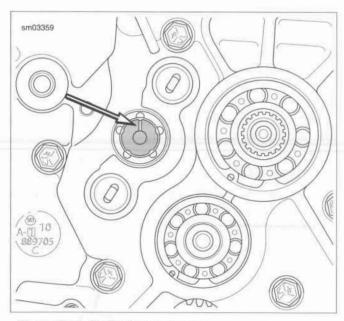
Scribed Line on Shifter Drum at 12 o'clock
